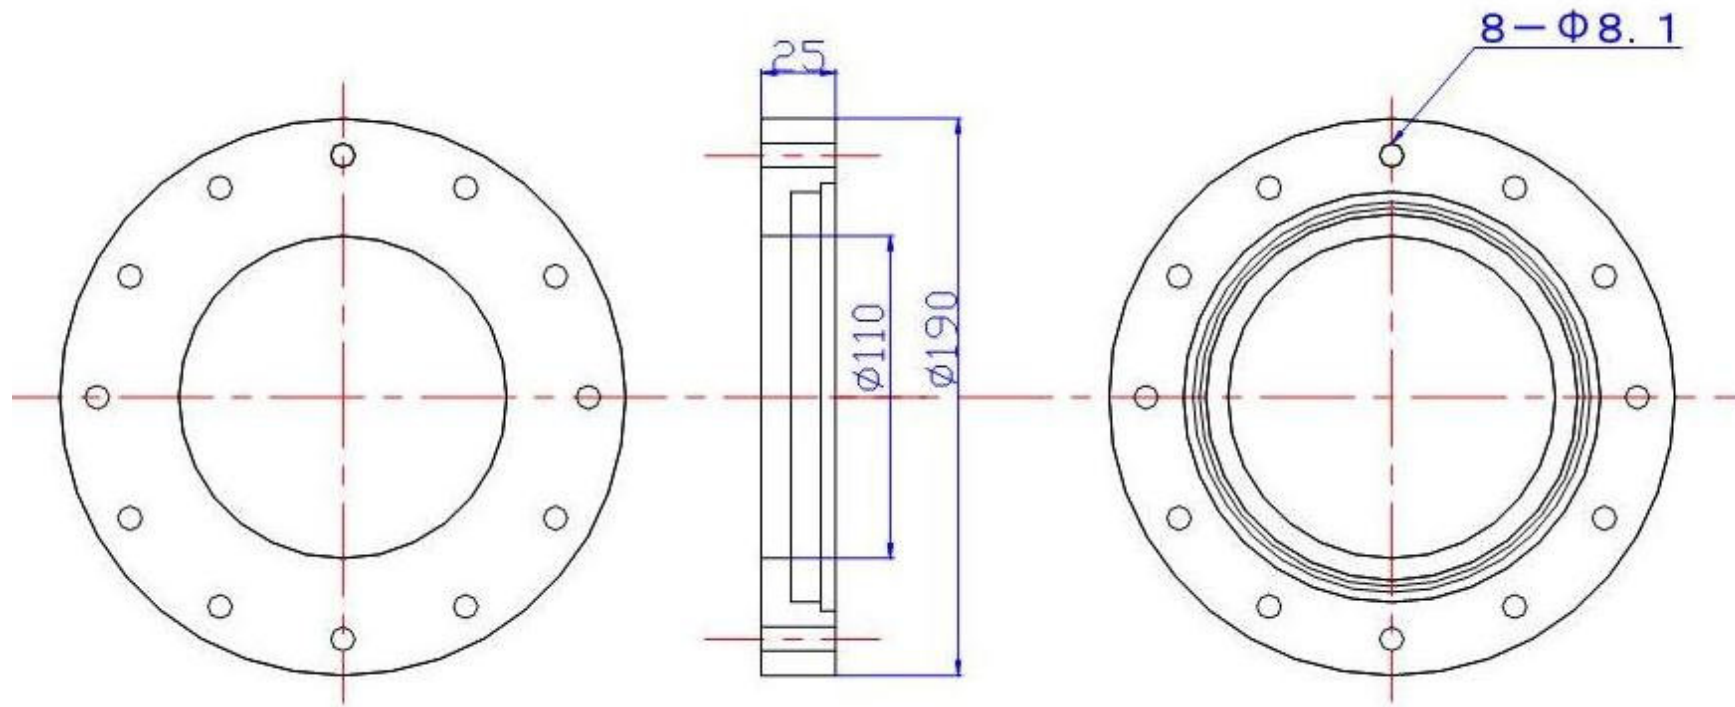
Manufacturing drawing of cylindrical combustion bomb (Side view)
